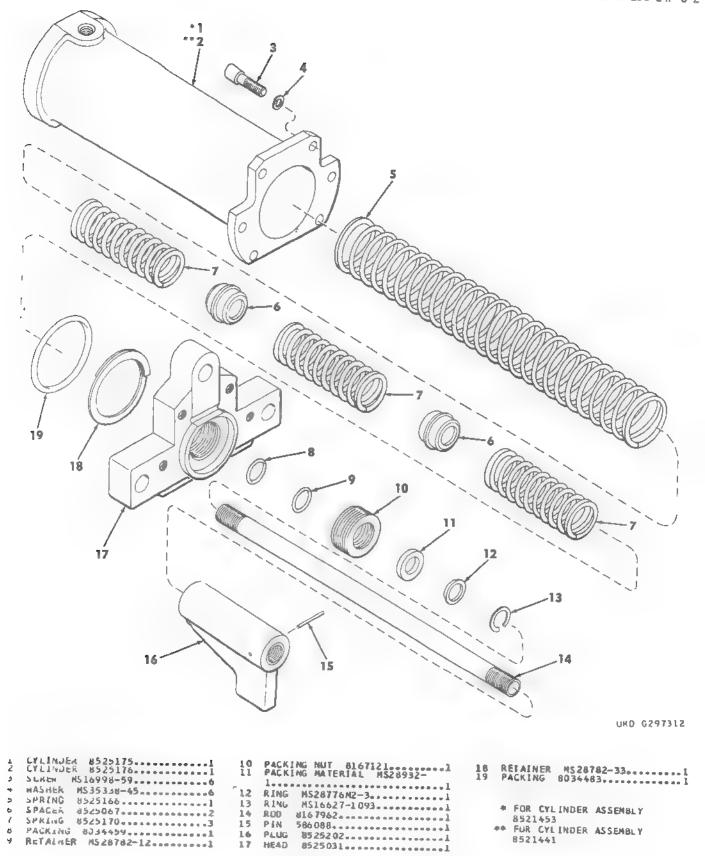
CYLINDER ASSEMBLY, ACTUATING, LINEAR /8521441 AND 8521453/
